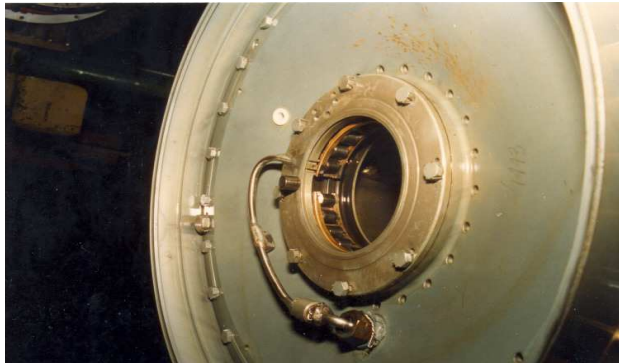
Damaged elements of the SO-3 engine middle bearing
